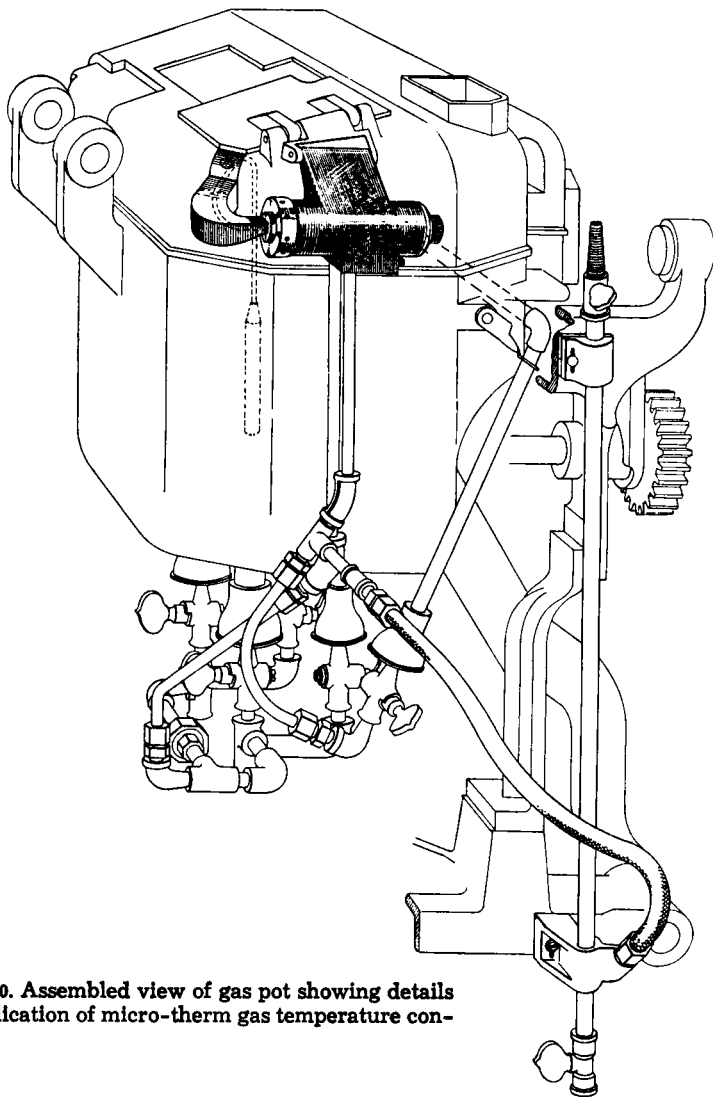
Assembled view of gas pot showing details and application of micro-therm gas temperature control.
